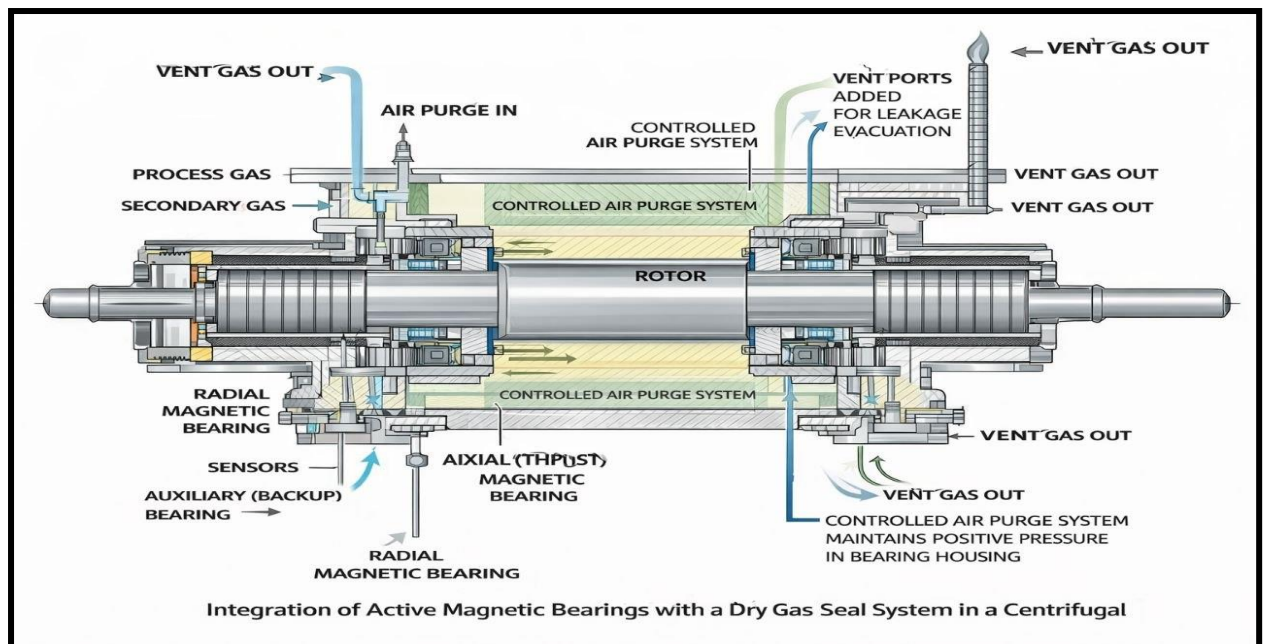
Adaptation of the Gas Seal to Magnetic Bearings in Centrifugal Compressors [2].
